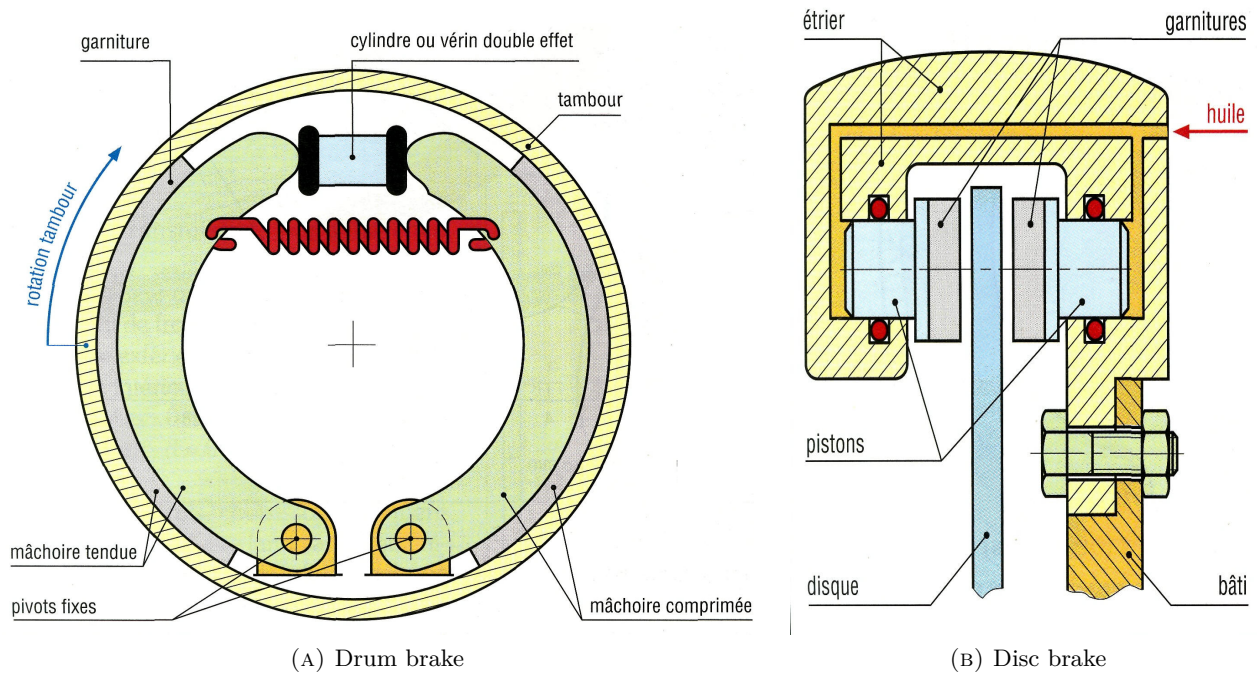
Diagram of a drum brake (A) and a disc brake (B).
